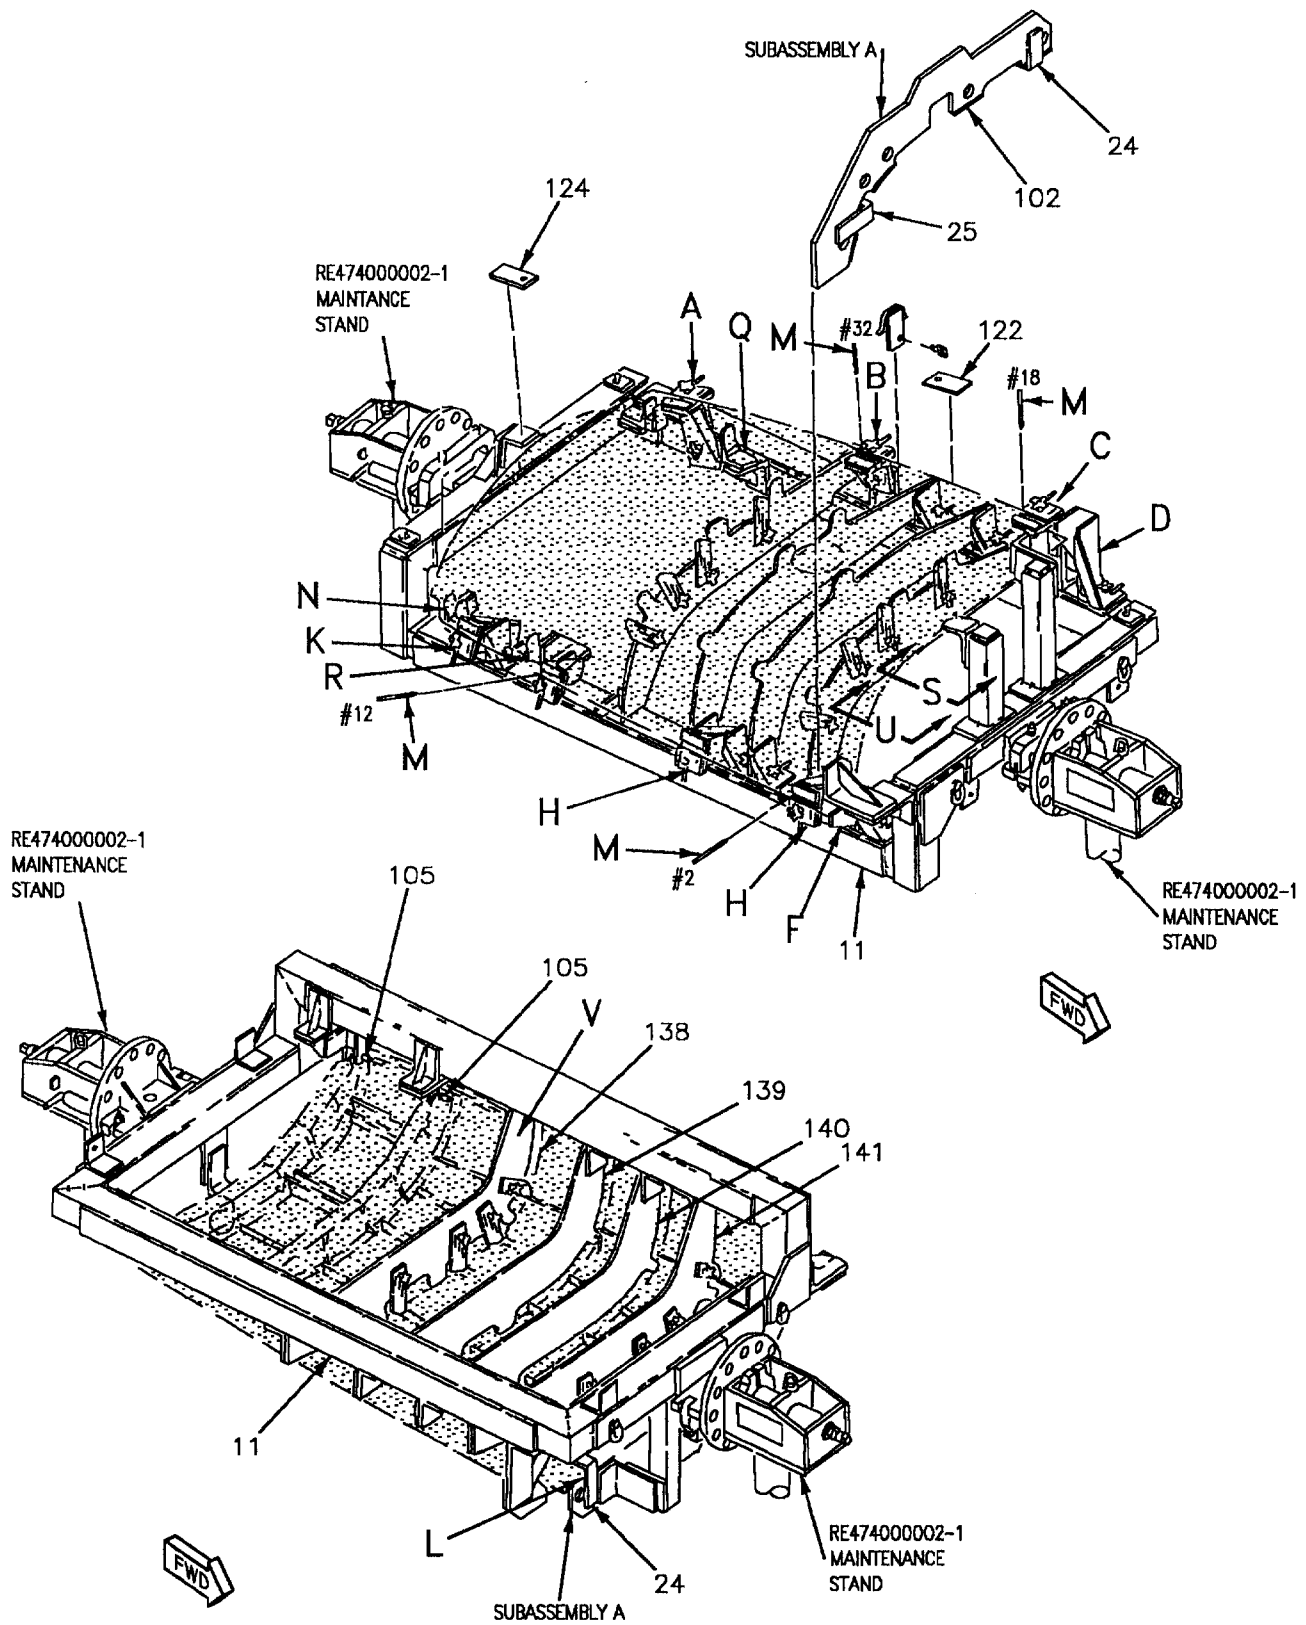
Maintenance Fixture RE174330621-1, -2 Details for Skin and Formers Replacement (Sheet 1)
